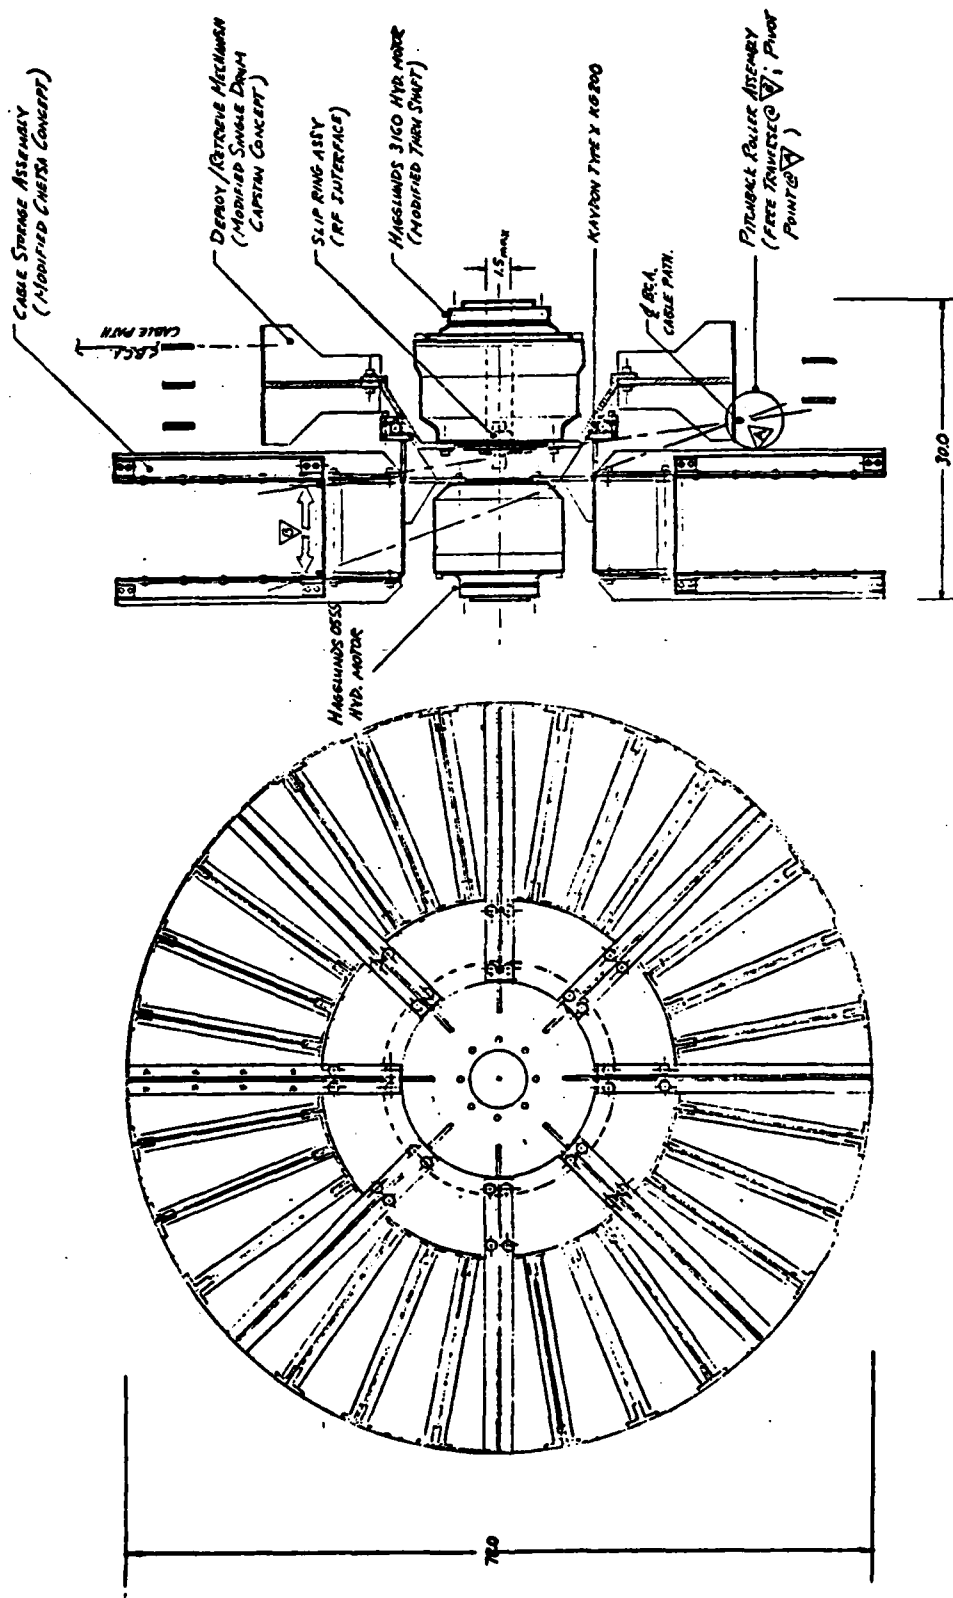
Cable Storage Assembly with Representative Packaging Layout, Modified for Tandem Installation Configuration
